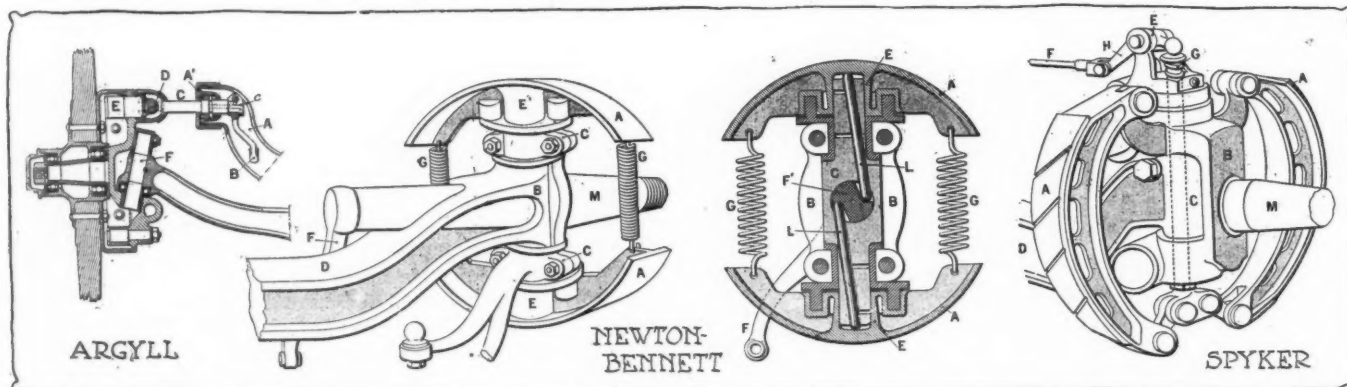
Argyll front brake, the most widely used device of its class; A frame transverse, A' frame reach, B brake lever, C brake shaft, D universal joint, E cam, F steering pivot, G oil hole. Fig. 2—Newton-Bennett brake, AA brake shoes, B pivot pin, C steering knuckle, D front axle, F brake lever with shaft F' passing through axle; figure to the right shows interior rods LL by which brake shoes are operated, EE cups integral with brake shoes to house the rods LL. Fig. 3—Spyker front brake; reference letters same as for Fig. 2: EH bell lever actuating shaft C and upper and lower toggles. This system results in more uniform contact of brake shoes with drum than can be effected by single cam with either single or double brake shoe pivot.
